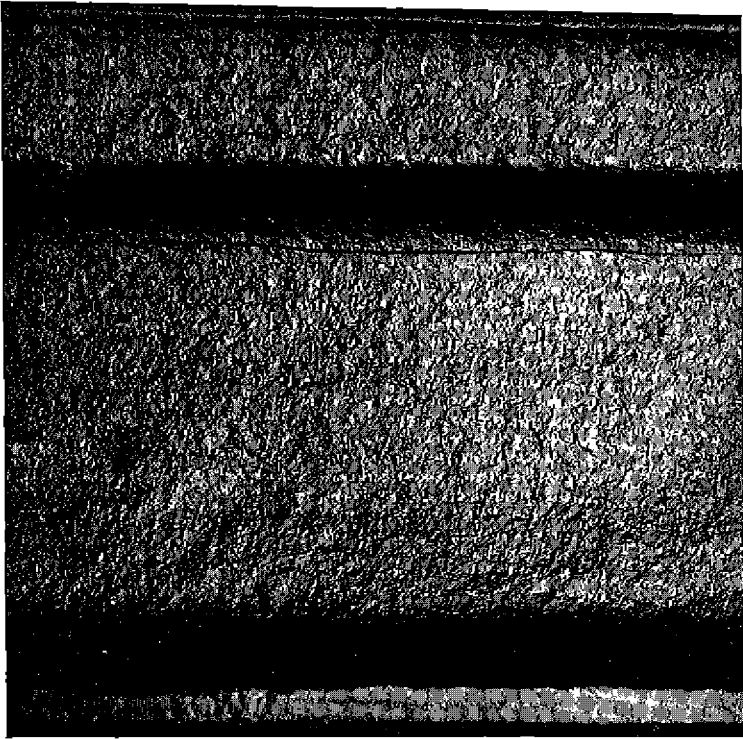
Side view of rail, showing longitudinal crack at the fillet under the head, where split head fracture had reached the peripheral surface of the rail
